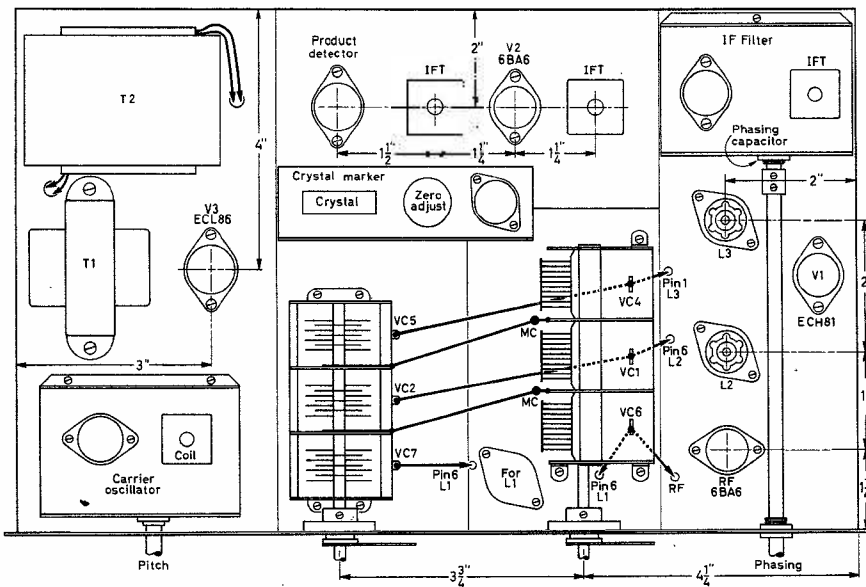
(left) shows the disposition of the major components and units on top of the chassis while Fig. 4: (below) illustrates the wiring beneath.
